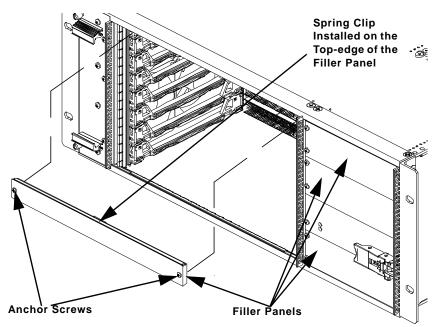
Installing Filler Panels on the Indoor Unit's Chassis
